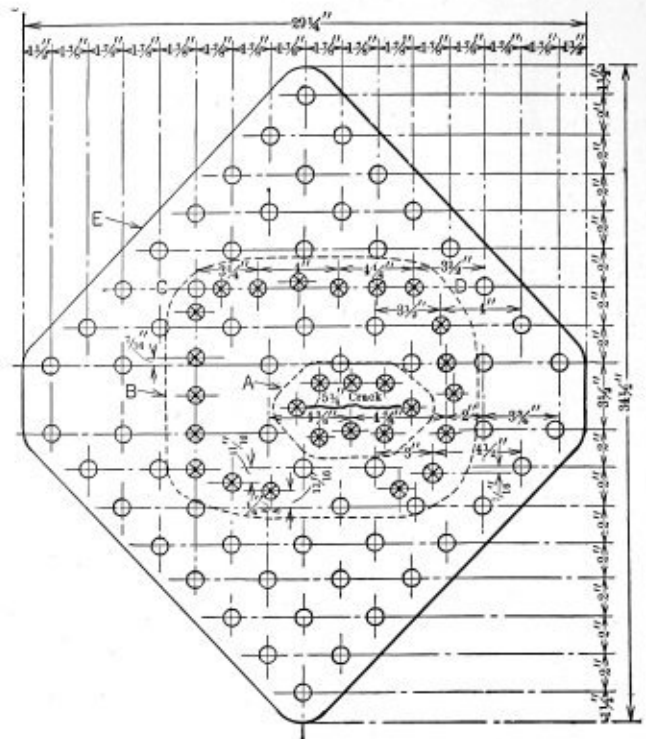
Holes Marked X in Old Patch, 3/4-Inch Boiler Steel, 15/16-Inch Holes, 7/8-Inch Rivets
